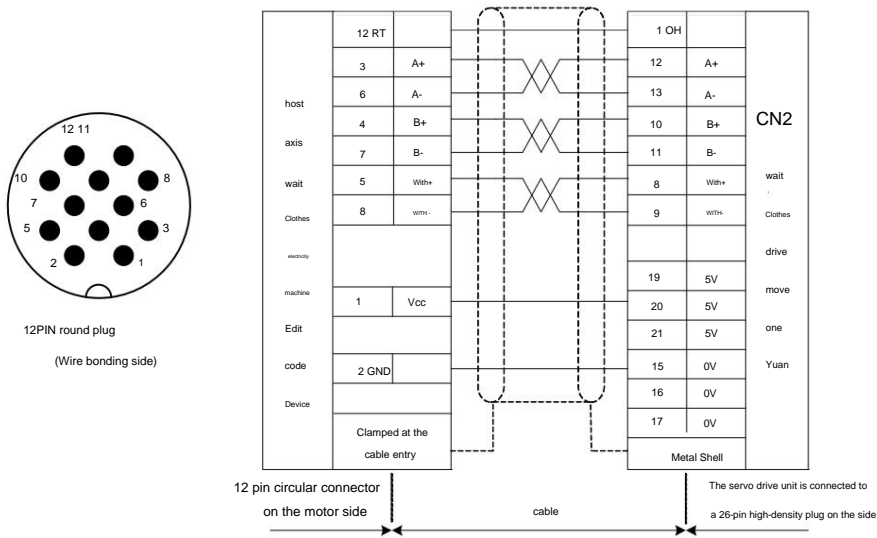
CN2 spindle servo motor incremental encoder wiring diagram using 12-pin metal plug
